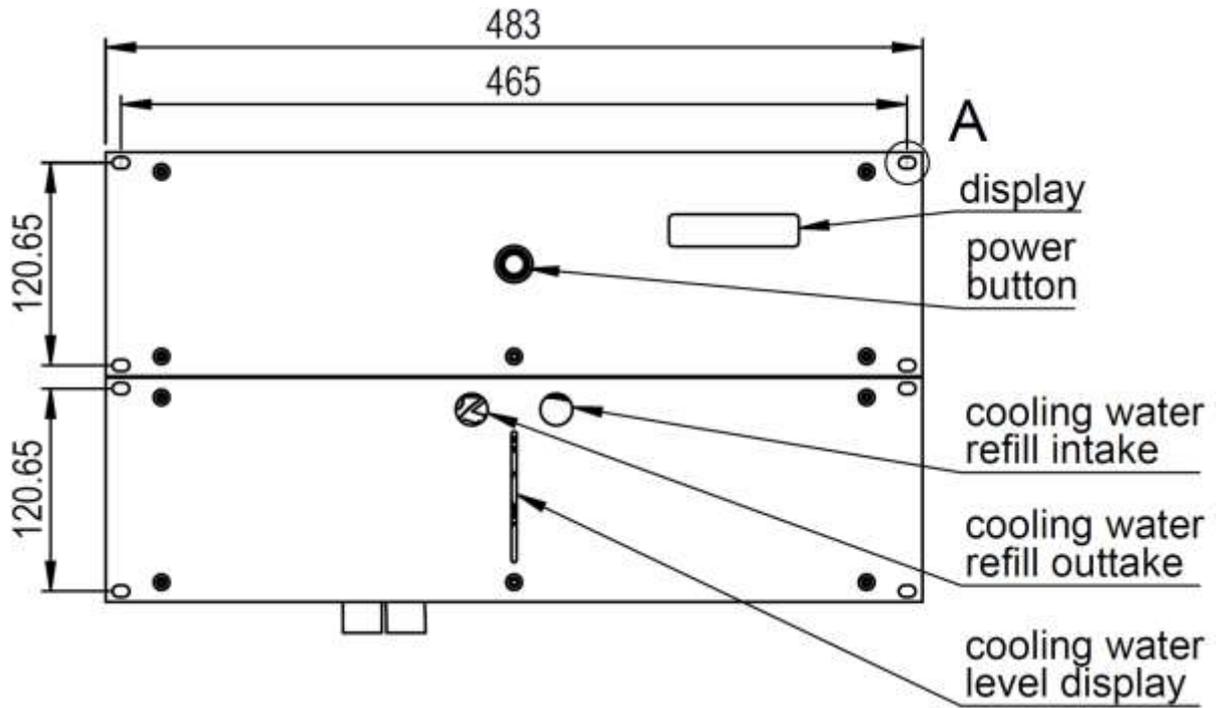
CoatMaster Inline - Control (top) and Cooling (bottom) units - front view
